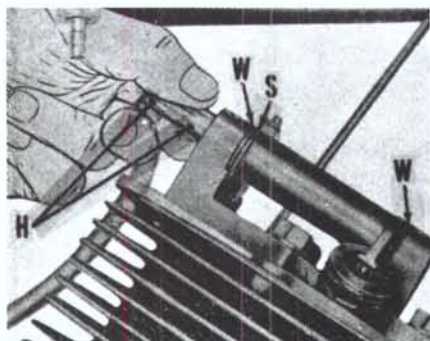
Spring (S) should be toward rear and washer (W) should be installed on each end next to the bracket. Oil holes (H) should be down as shown.
